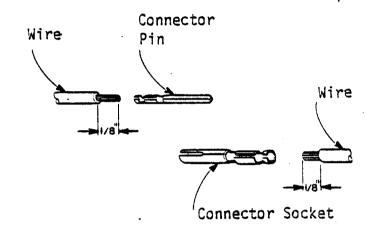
A. Connector Pin and Connector Socket Wire Insertion
